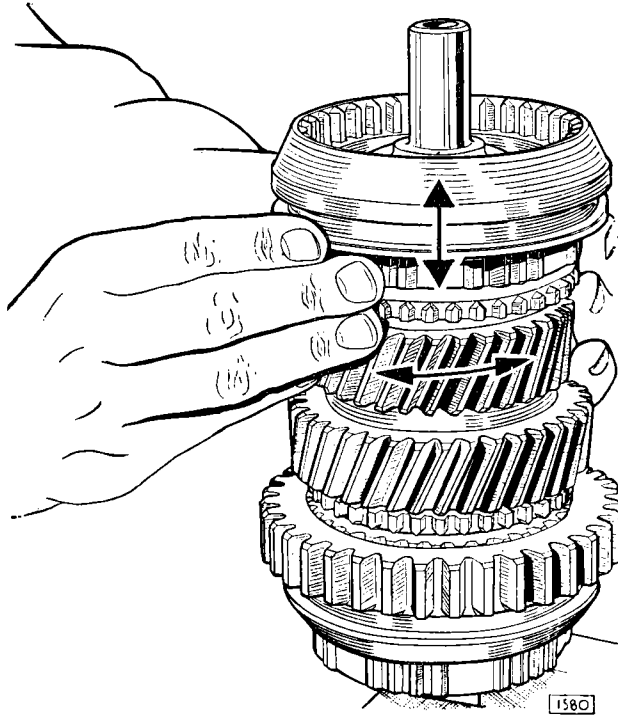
Checking the 4th (top) interlock plunger. With the top gear engaged there should be approximately $\frac{1}{16}$ " (4.76 mm) axial movement without any drag. With the top gear still engaged and with a slight downward pressure exerted on the synchro assembly the 3rd speed gear should be free to rotate
